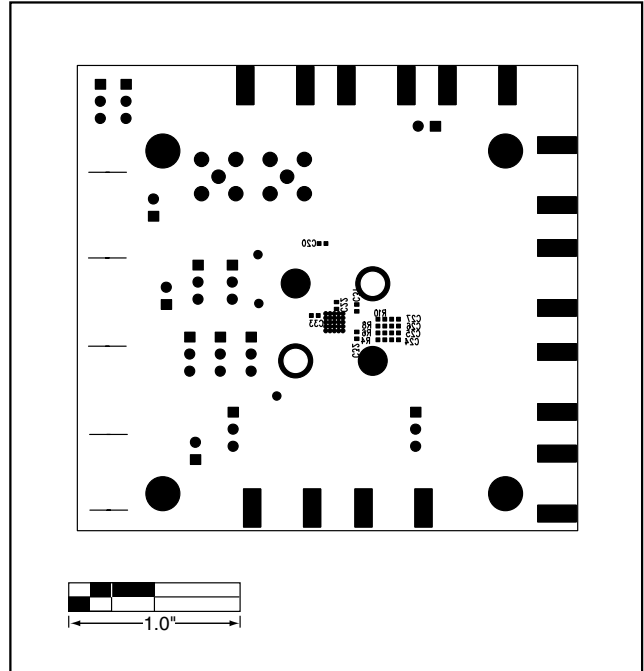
MAX3670 EV Kit Component Placement Guide—Solder Side
